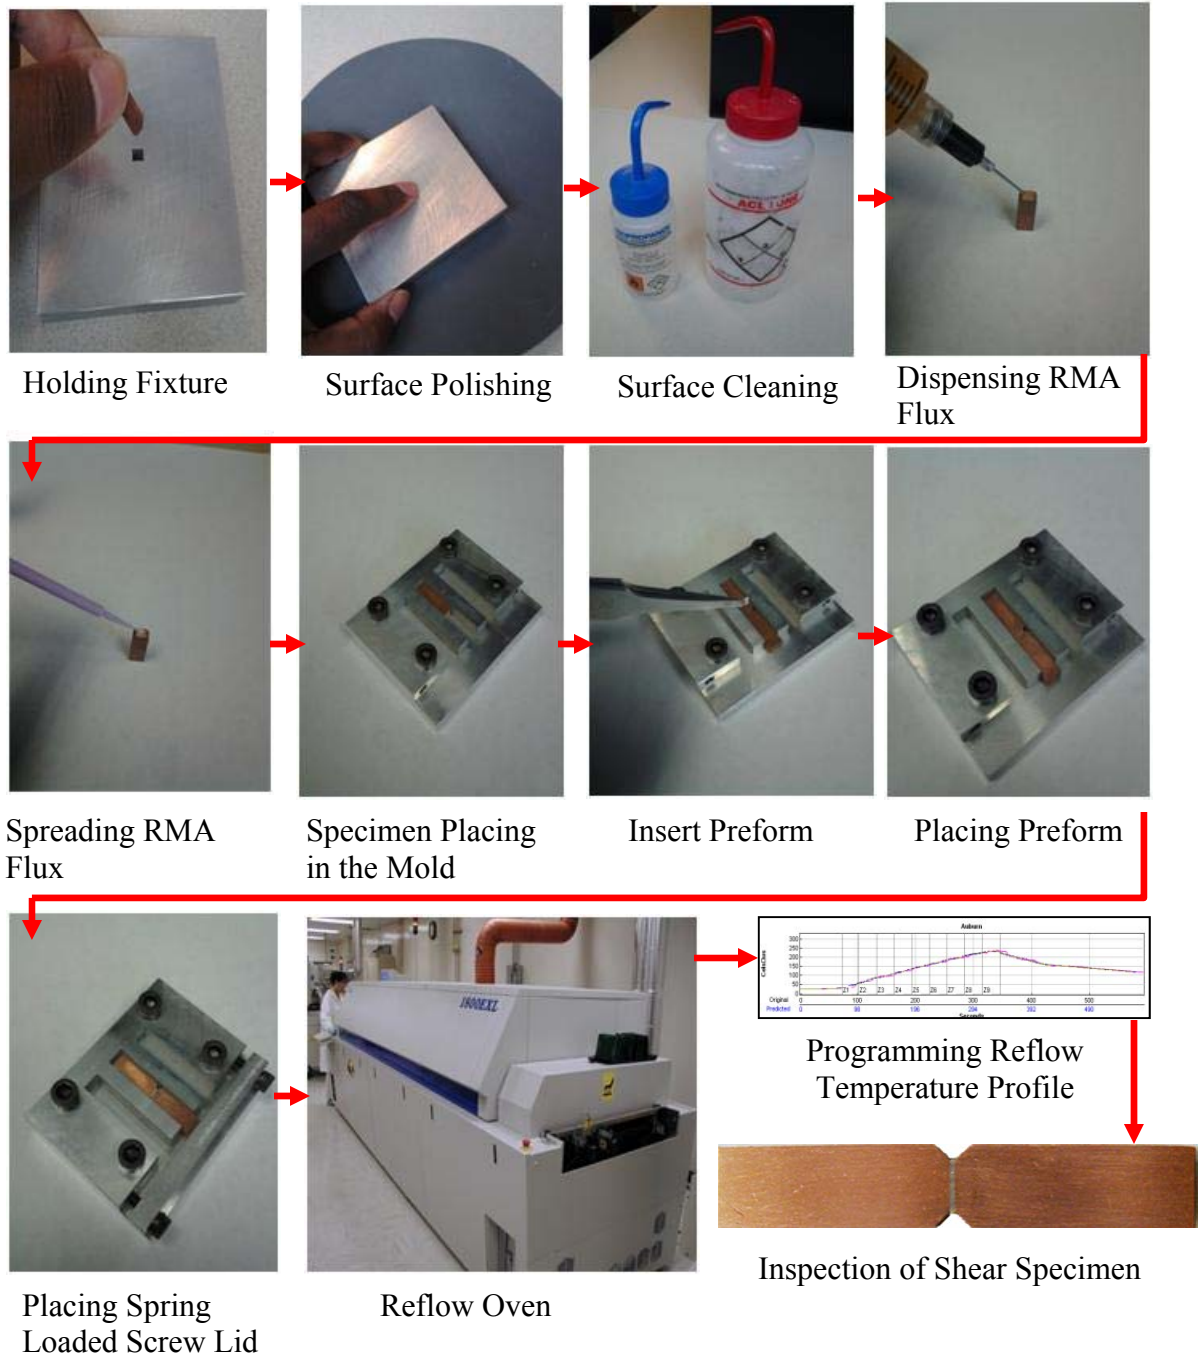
Flow Chart for Preparing Iosipescu Shear Specimen Assemblies
